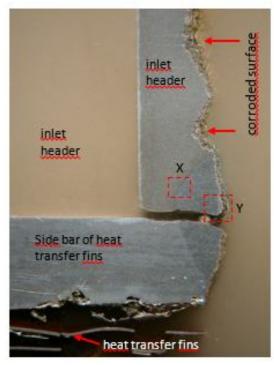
Cross section of a polished and etched specimen obtained from the leaked weld joint between header and side bar/parting sheet
